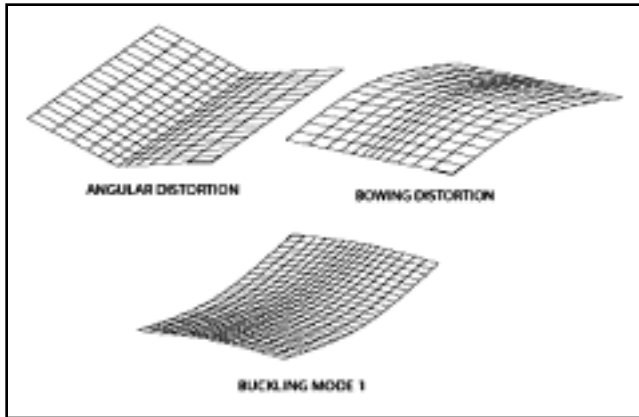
Types of out-of-plane distortion in butt-joint welded plates.
